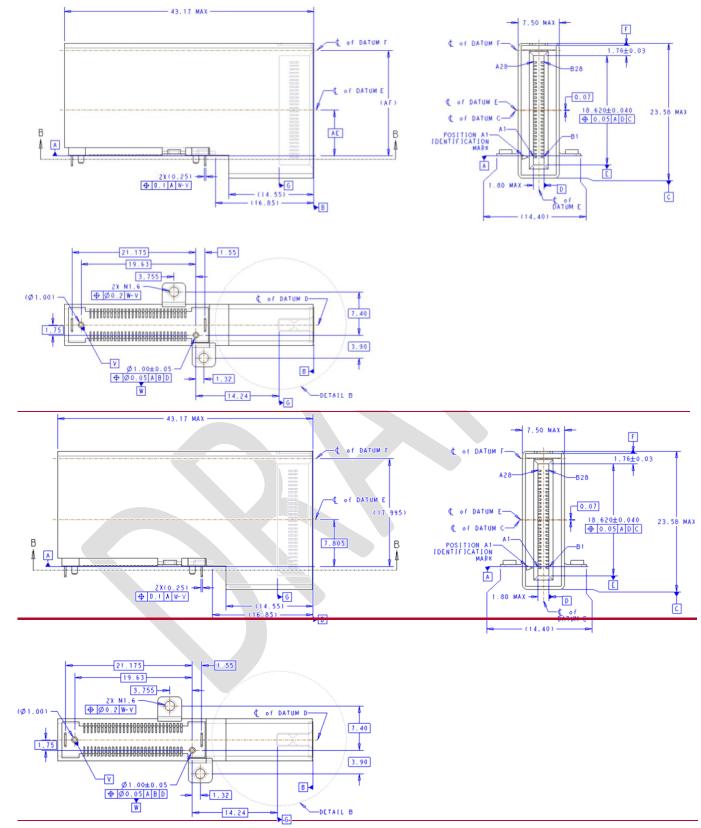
1C RIGHT ANGLE ORTHOGONAL SMT CONNECTOR DIMENSIONS (MM)
